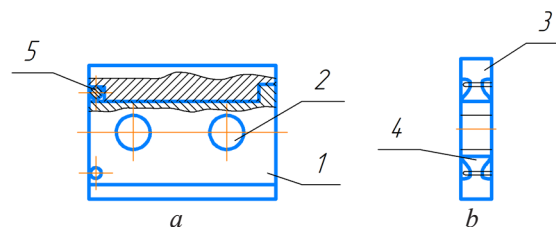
Hammer: *a* – General view of the hammer; *b* – Left side view of the hammer [95];
